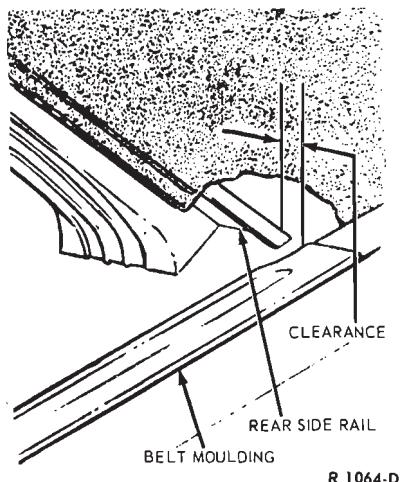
Top Rear Side Rail-To-Belt Moulding Clearance
